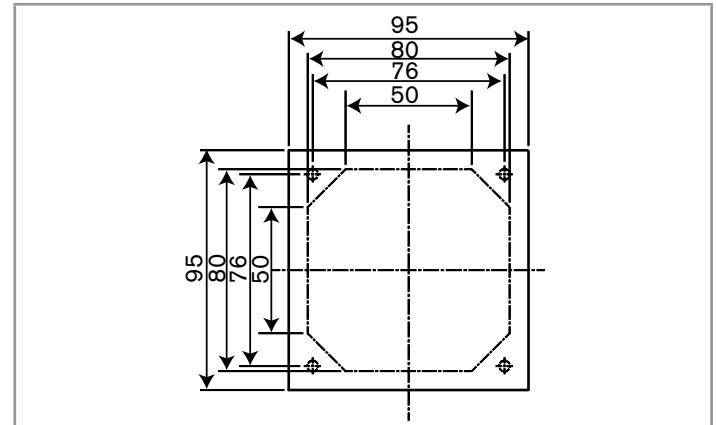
Dimensions [mm] of the electrical cabinet frontage cutting plan
